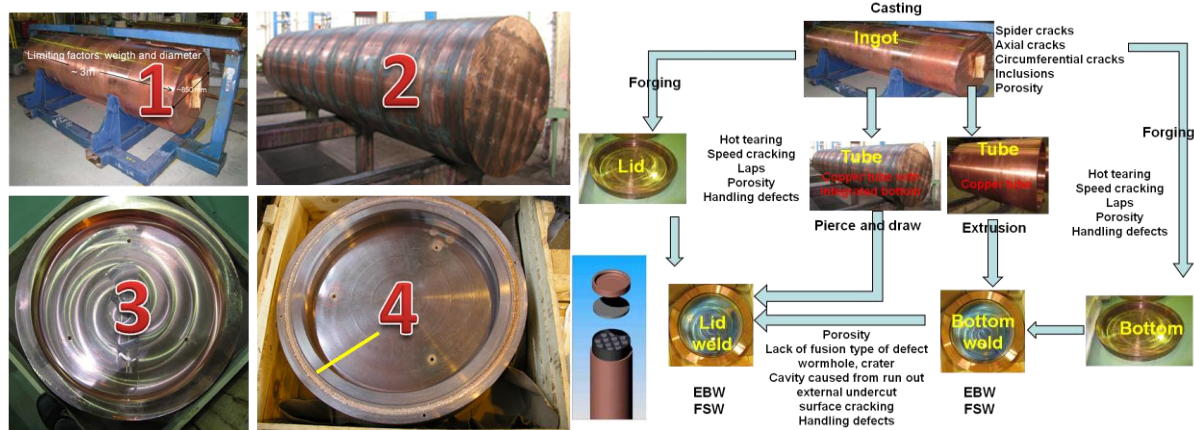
Copper billet (1), copper tube with integrated bottom (2), lid (3) and EB-weld (4) combines the copper tube and the lid (on the left). The possible defect types are mentioned based on the manufacturing method as shown in the right image.
